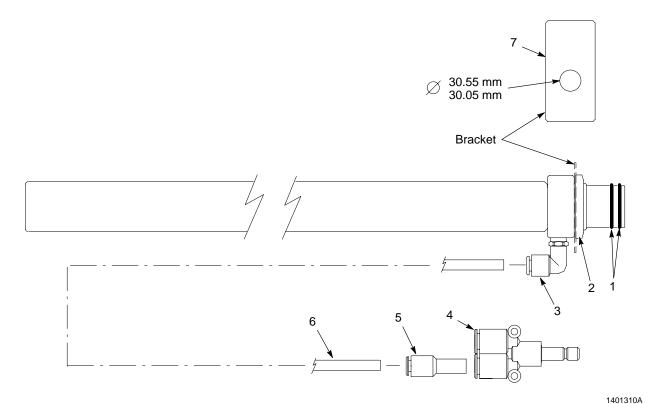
One-Piece Fluidizing Pickup Tube Kit
